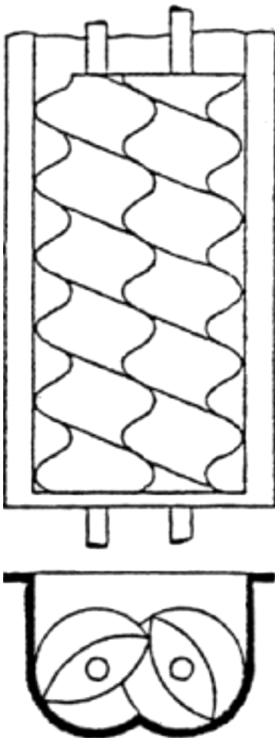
Wunsche 1901 self-wiping co-rotating twin-screw extruder.
